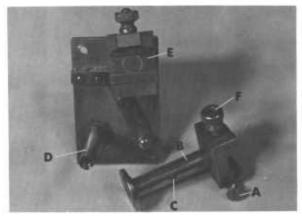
Unassembled Townsend Support: A, Spinner clamp retaining screw; B, spinning clamp; C, oil hole; D, spinner shaft; E, upper clamp; F, thumbscrew.
